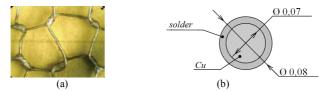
Fragment of knitted soldered mesh (a), schematically showed copper wire with solder TLS-61(b)
